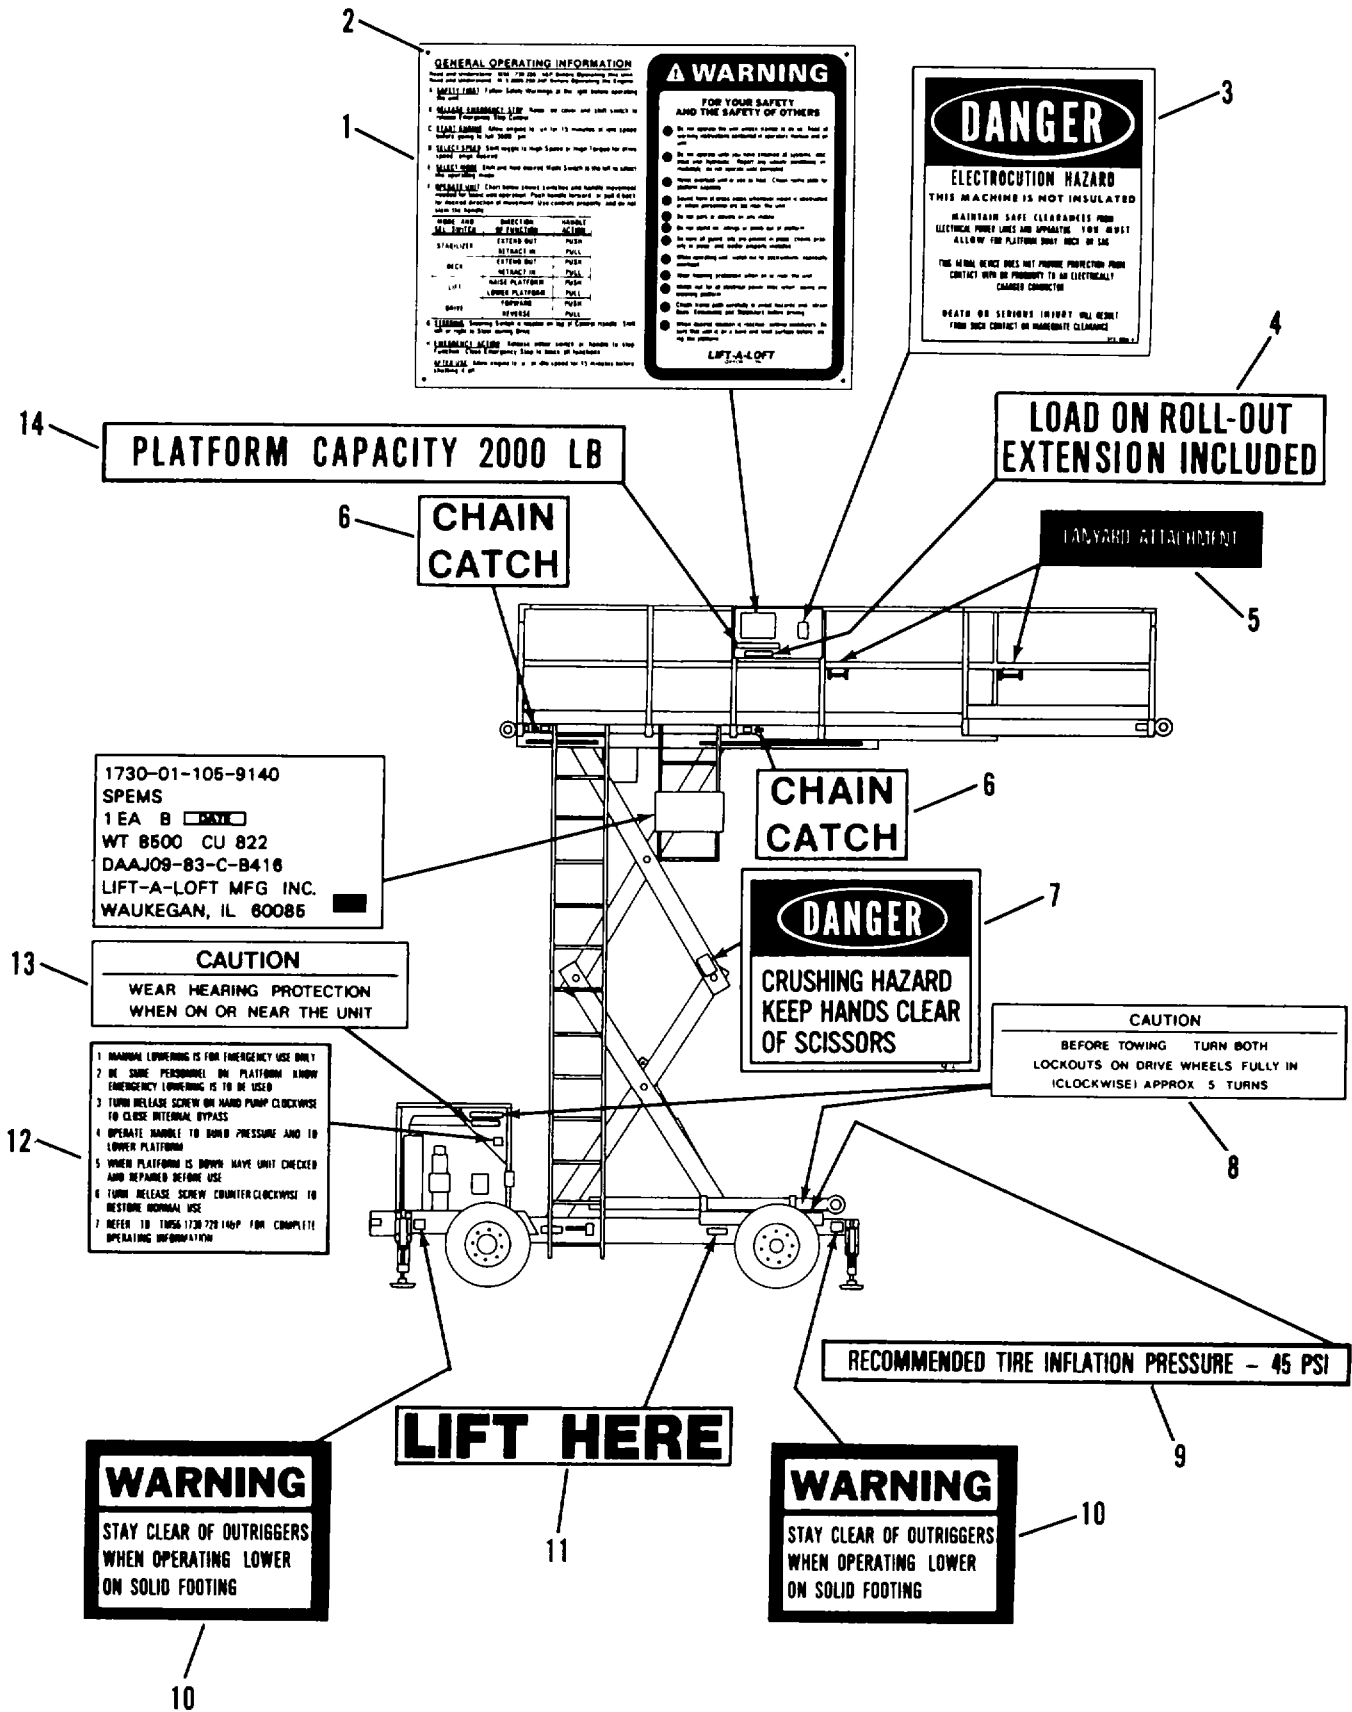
SPEMS Dress Package (Sheet 1 of 4)
